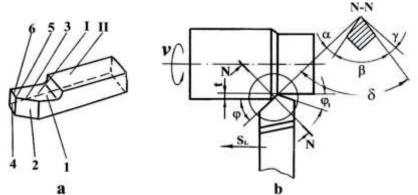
Elements, surfaces and cutting angles of a turning tool: I – working part; II – shank;
